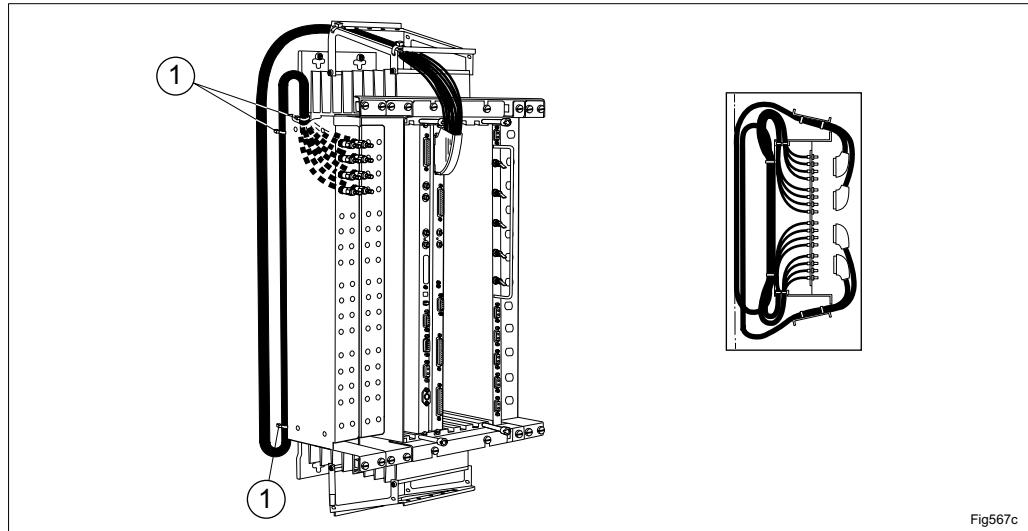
Installation of a panel in a wall installation with 2 m assembled coaxial cables. The figure shows a panel with SMZ connectors.
